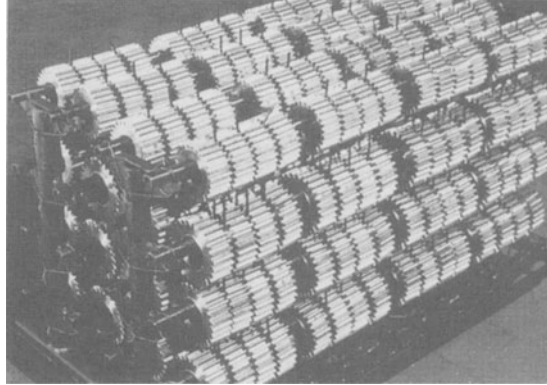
View of a gear load on its fixture before introduction in the gas carburizing furnace .
